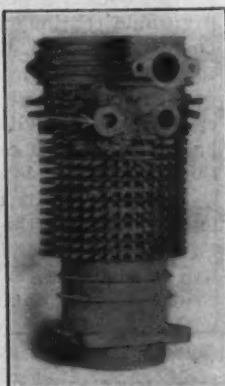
An Extra Igniter Boss Added to a Cylinder.
